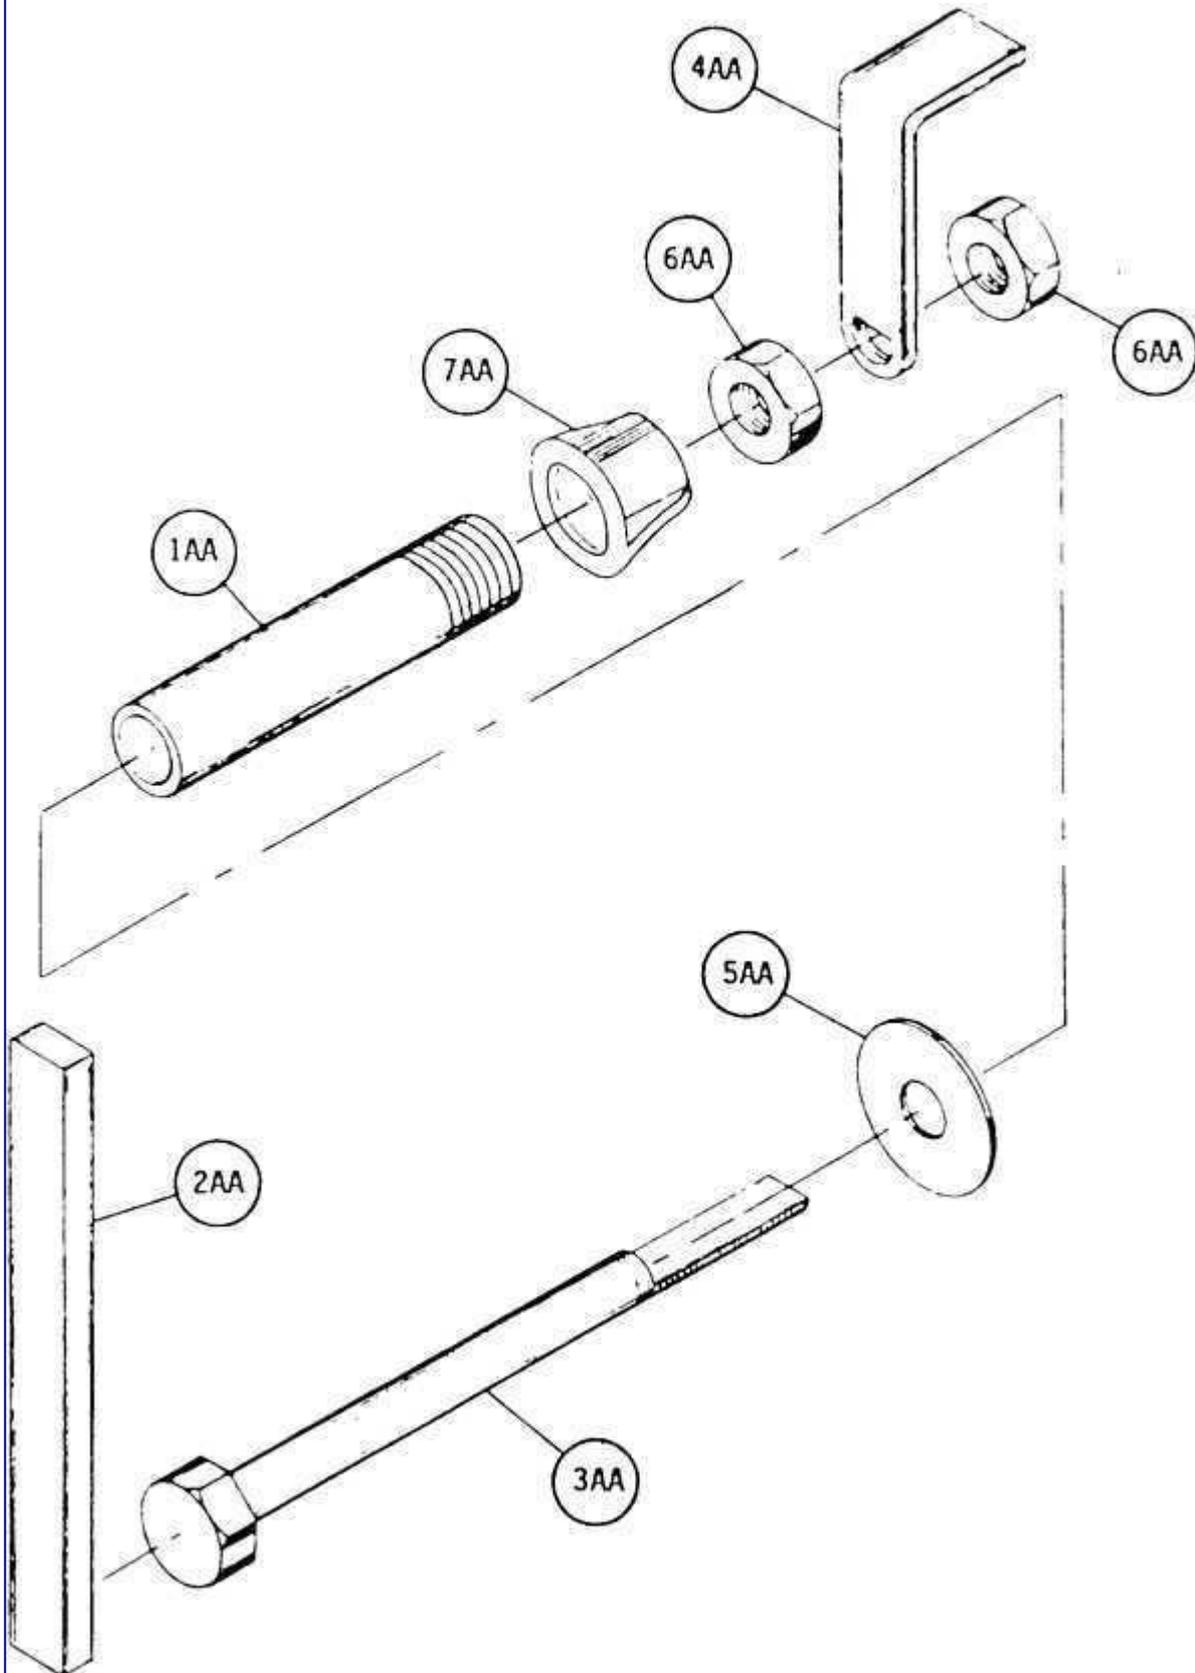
Exploded, schematic diagram of the grate shaking mechanism.
